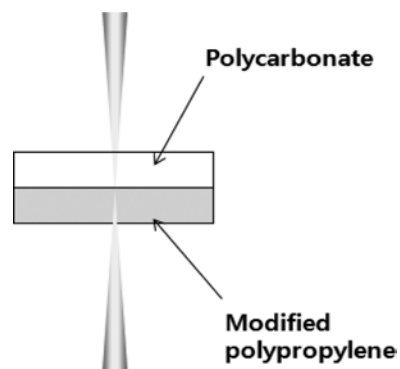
Laser welding of modified PP(without carbon black) and PC.
